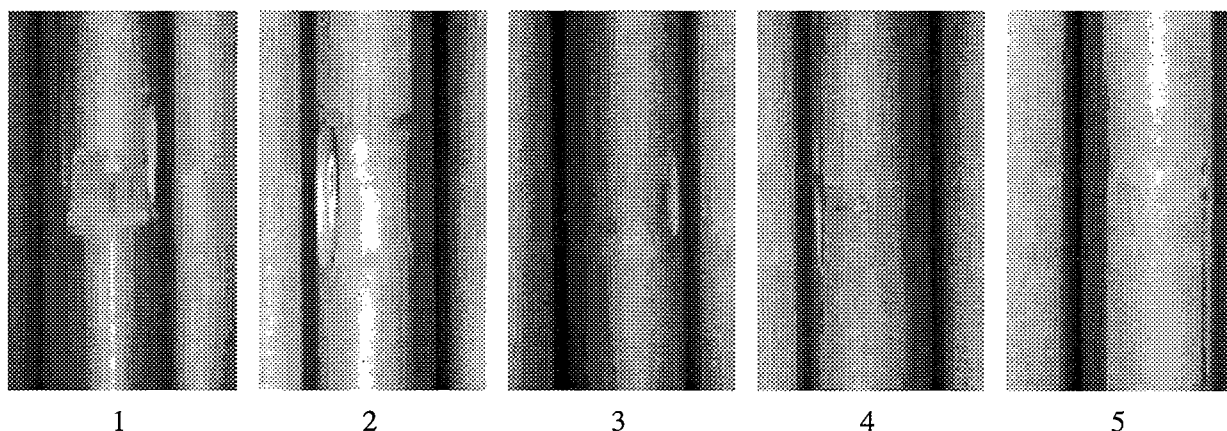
Fretting marks on rod G1 of SS-2 assembly at grid contact points of 1. - 5. spacer grids
